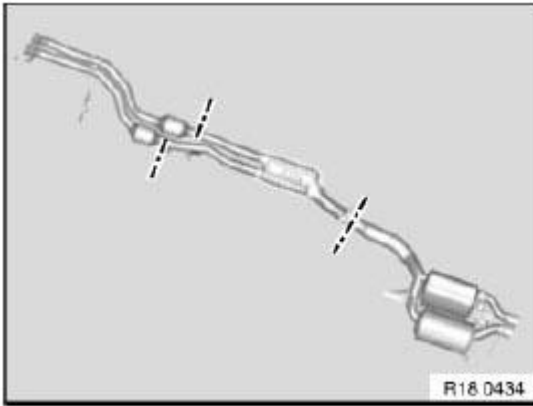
Identifying Centre Muffler Lines Cutting Point
